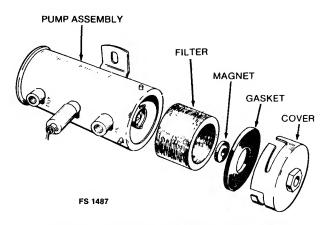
REMOVAL OF MAGNET AND FILTER
